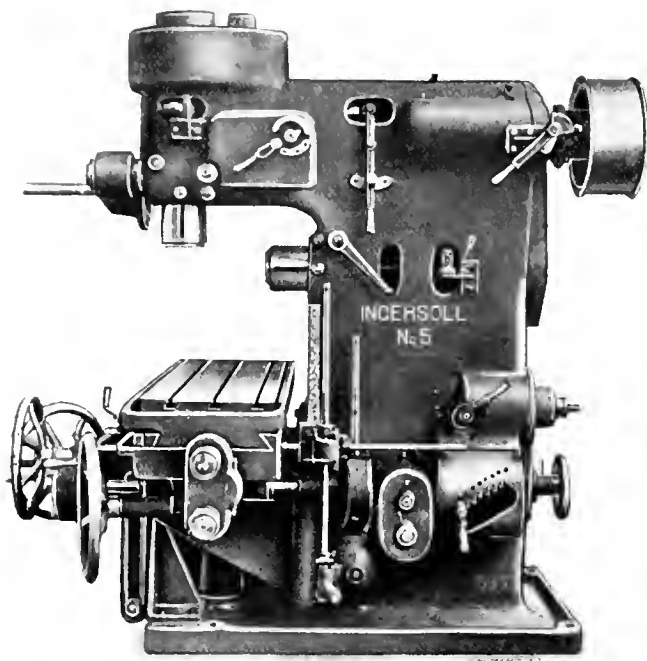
The Largest Size of the Ingersoll Combined Vertical and Horizontal Column Type Miller
